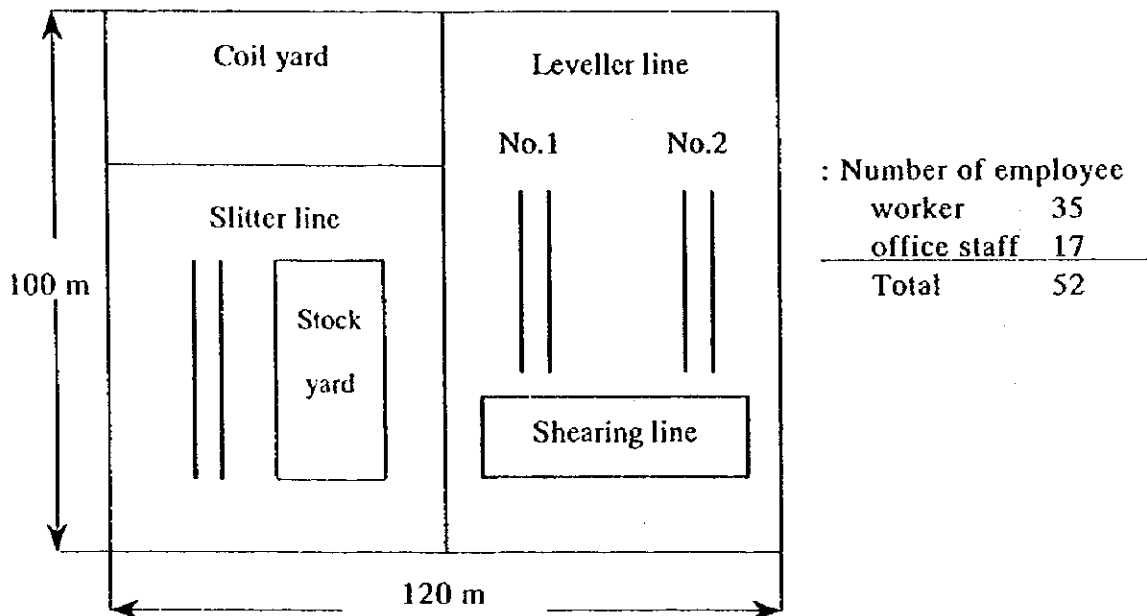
Layout of a coil center for cold rolled coil in Japan
